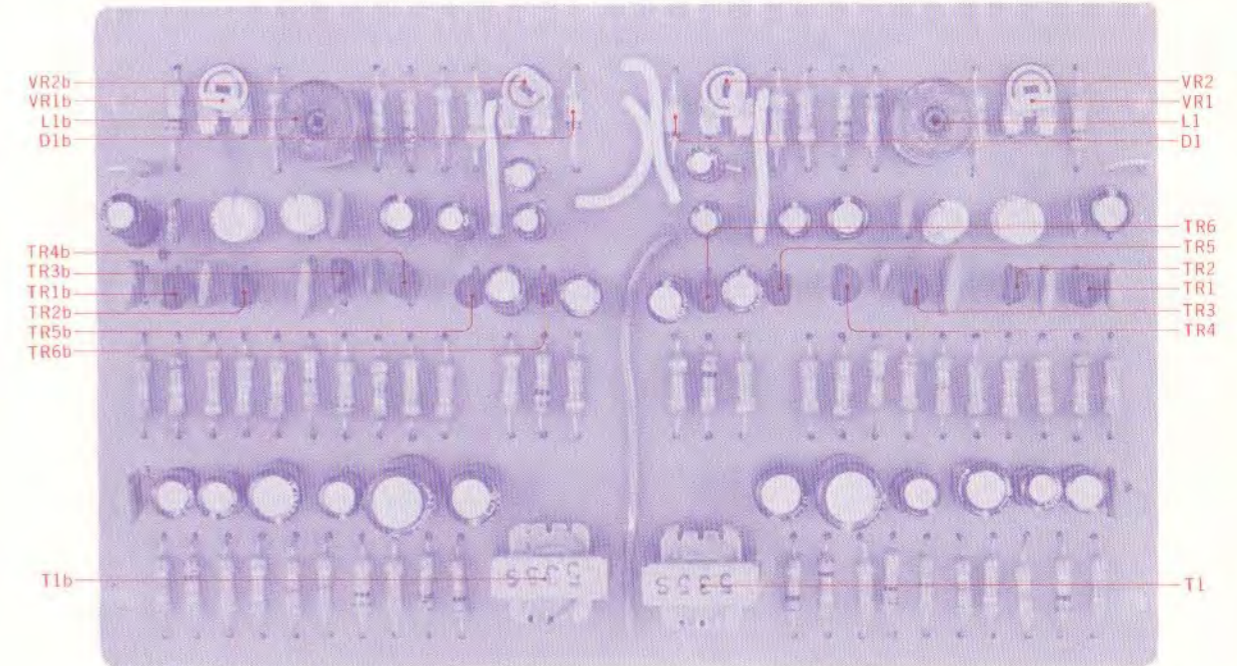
PHOTO OF P.B. AMP. P.C. BOARD (KJ-5025) BLOCK
